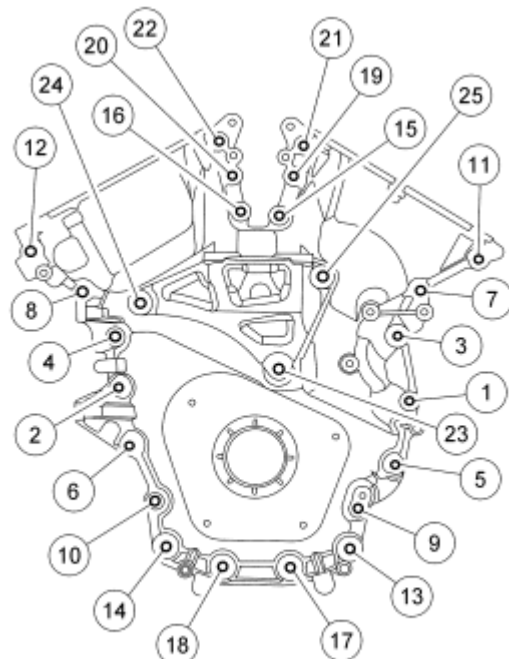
Identifying Tightening Of Engine Front Cover Bolts & Engine Mount Bracket Bolts In Sequence
